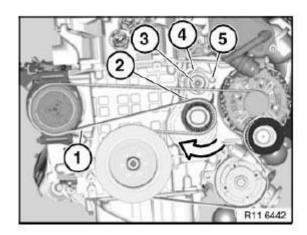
Identifying Belt Tensioner And Special Tool (11 3 340) Courtesy of BMW OF NORTH AMERICA, INC.
